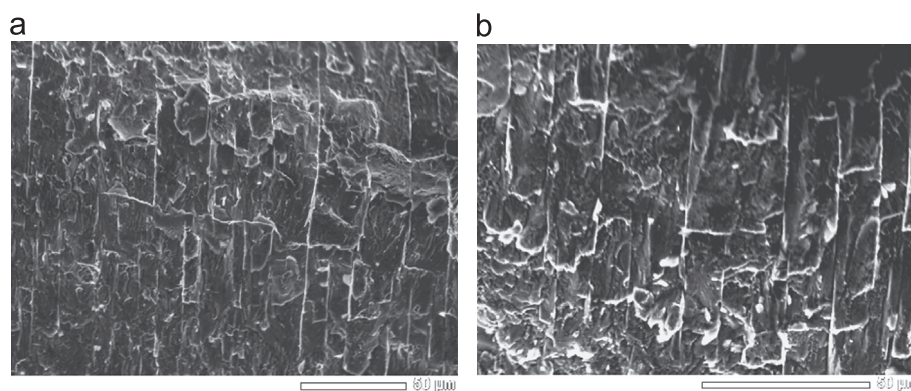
The fractography of the weld broken at AISI 316/MZ interfaces: welding speed 1.8 m/min and beam offset of -0.25 mm (a) and of 0 mm (b).
